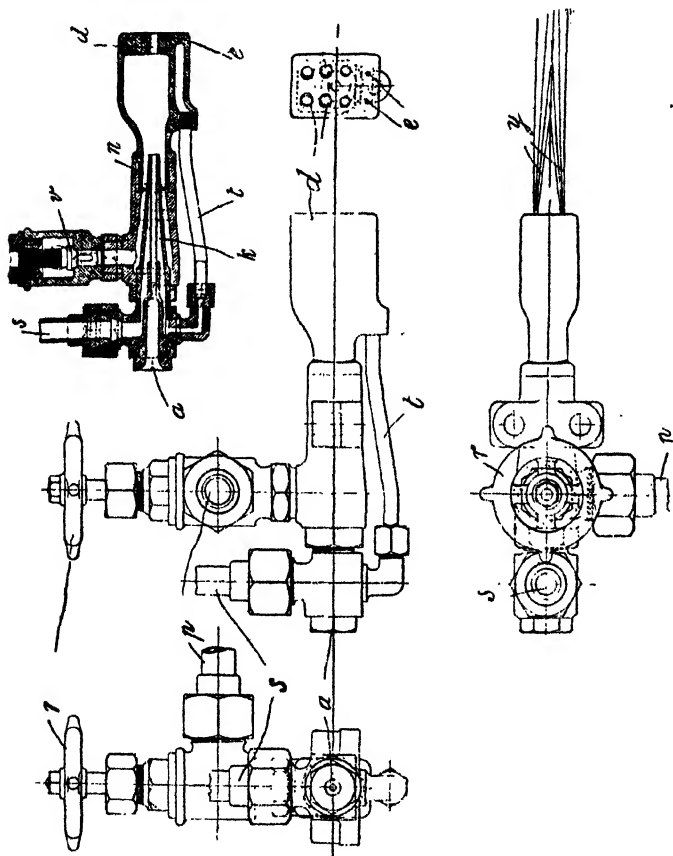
Elevation, section, and plan views of the latest form of the Holden steam-jet burner.
